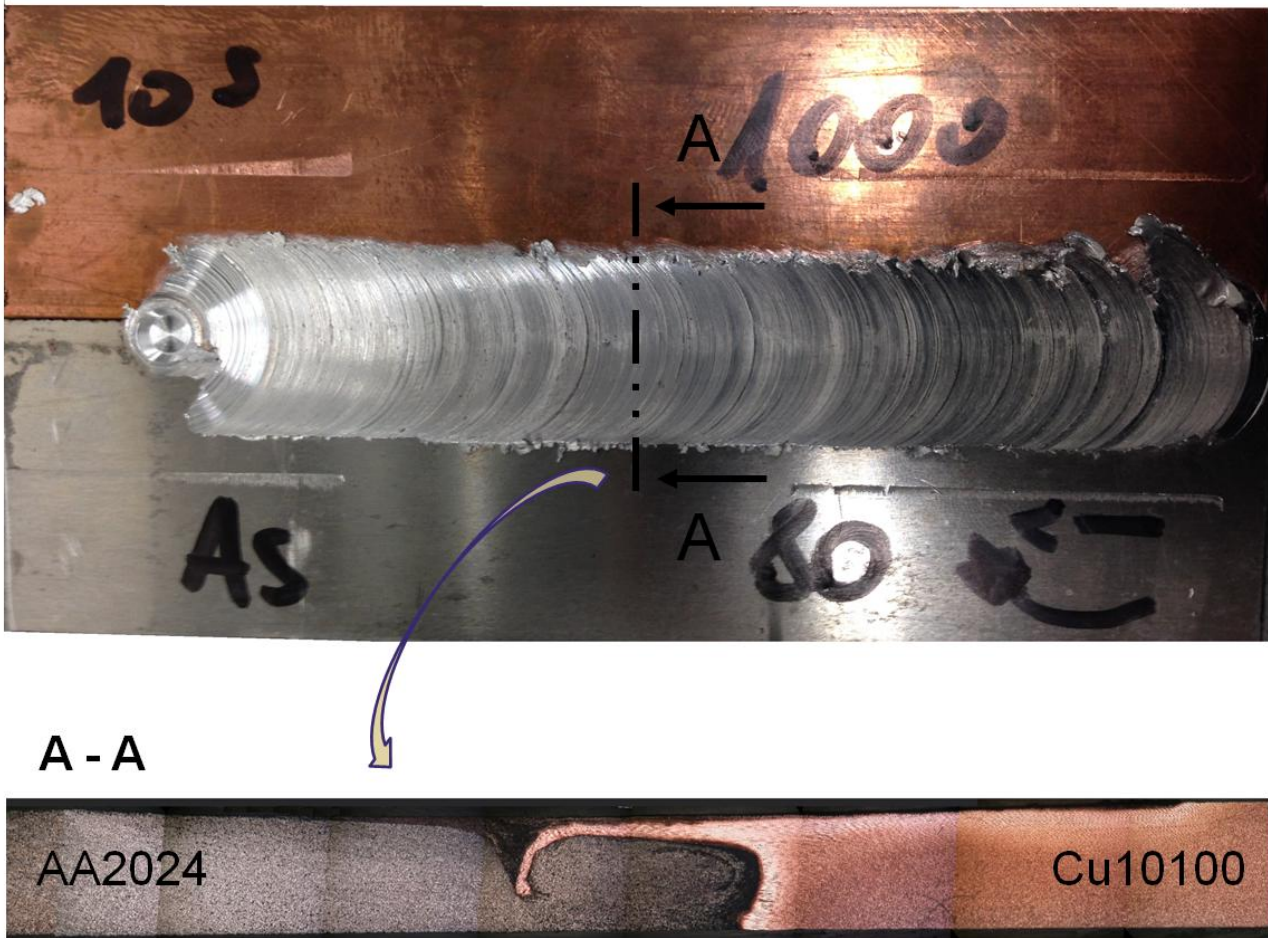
Surface morphology of the joint (top) and cross section macrograph of the joint (bottom).
